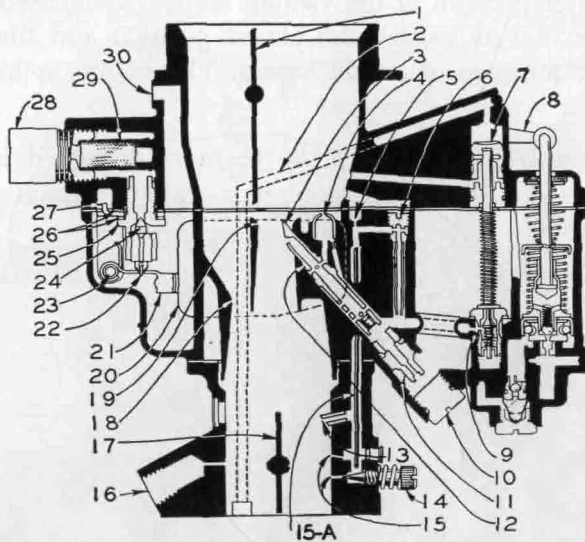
A dual carburetor for an eight-cylinder in-line engine, Two air horns and two low- and high-speed circuits are incorporated, each handling four cylinders. (Buick Motor Division of General Motors Corporation)
